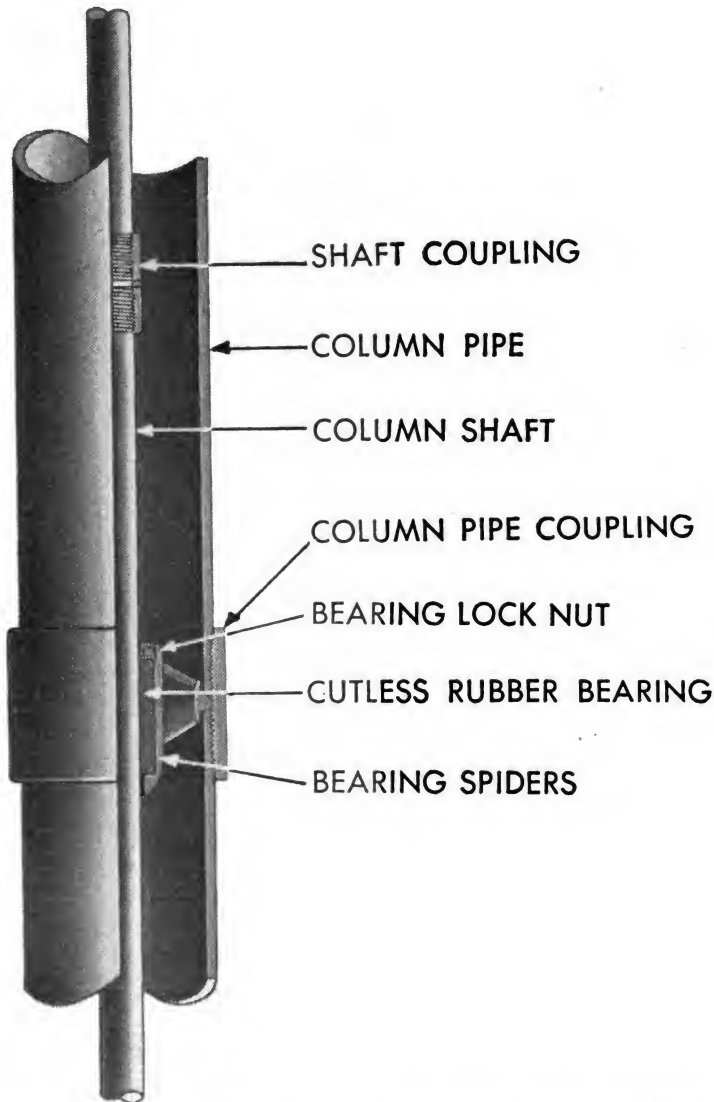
Pump column with open line shaft as used with the Hi-Lift and turbine pumps.
